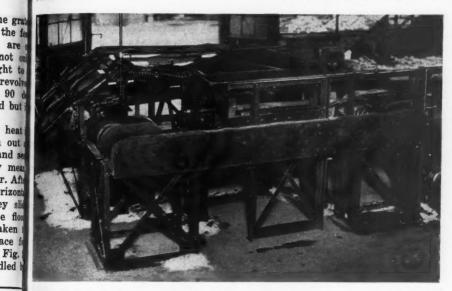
View at loading end of furnace, showing turntable conveyor handling pallets. At the left is the lifting mechanism; at the right, the pallets being loaded with forgings.
